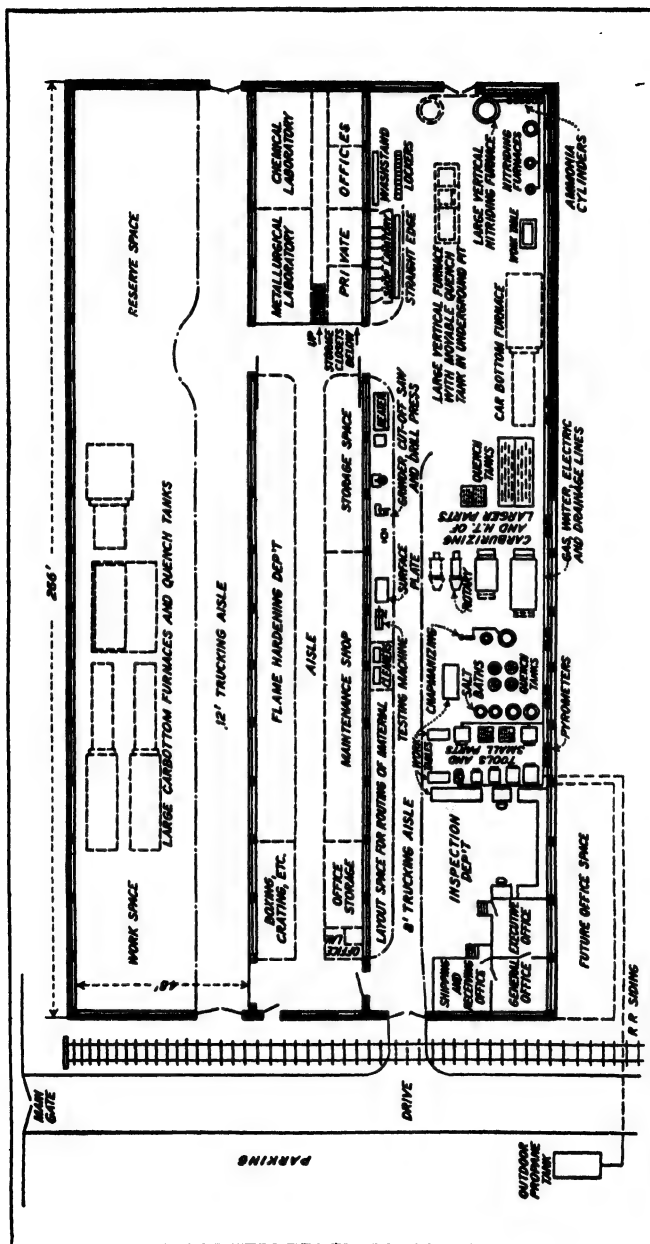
In this plan of plant arrangement present equipment is shown by full lines, projected equipment by dotted lines.
